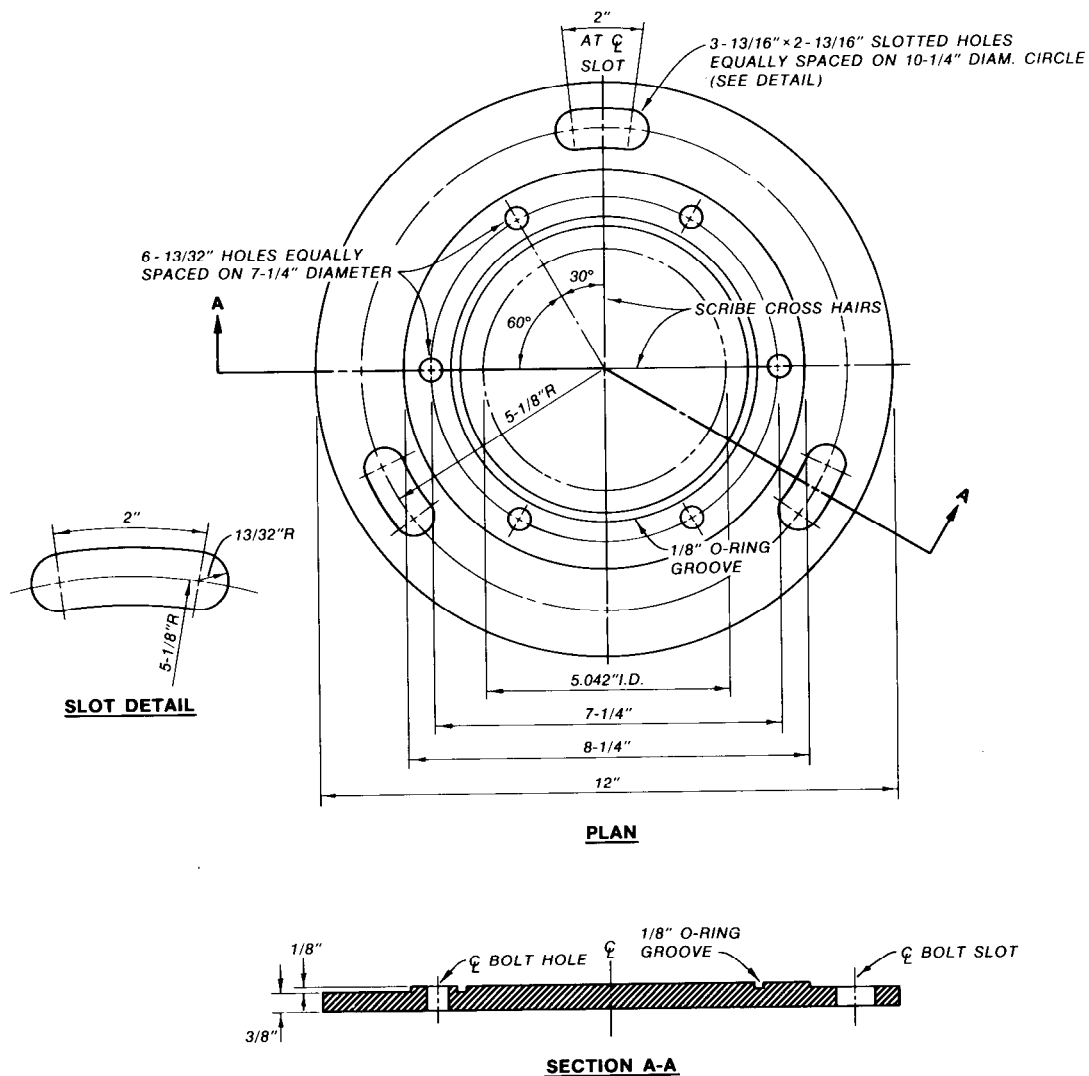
Details of Wall Deflection Pipes and Deflectometer
